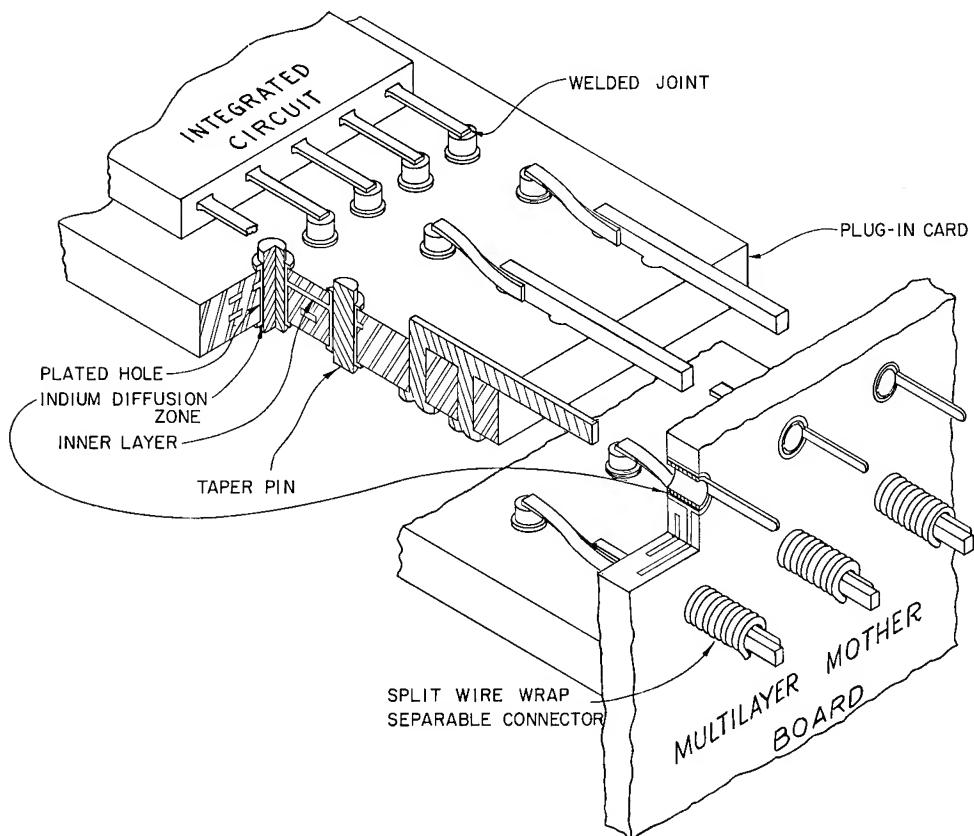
One method of interconnecting modules containing integrated circuits mounted on a "Fusicon" multilayer board is by using a multilayer "mother" board and separable "Wire-Wrap" connections.
